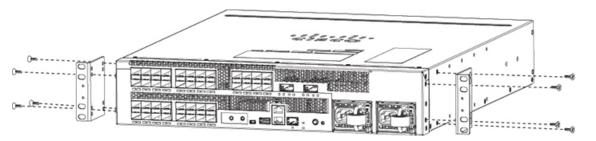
Installing the chassis on a Rack with a 17.5 in. (44.45 cm) Opening
